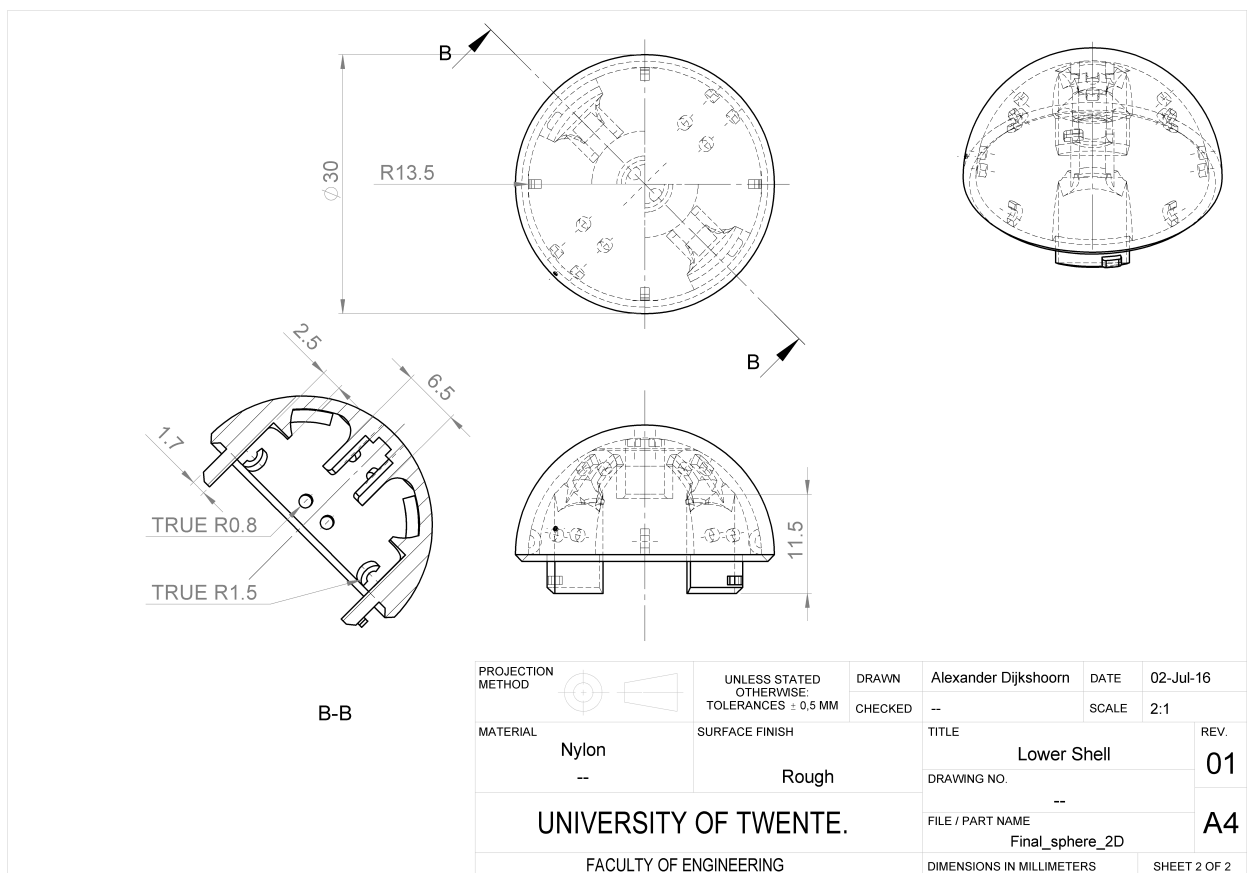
Technical drawing of one of the identical halves of the sphere used for testing magnet size and position.
